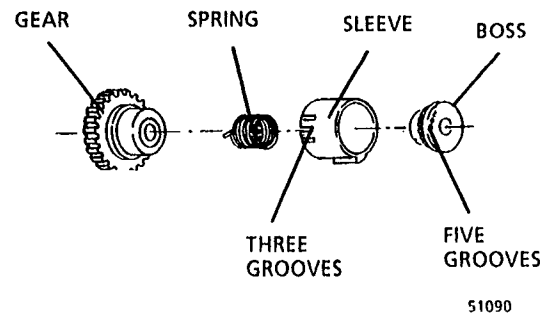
Removing the Boss, Spring, Sleeve, and Gear
